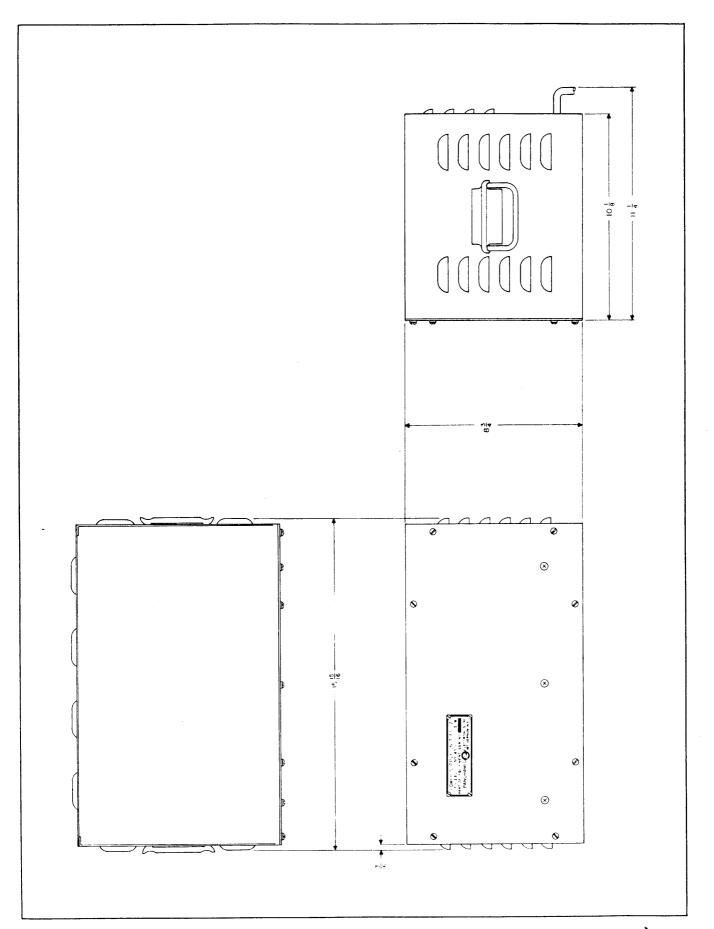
Outline Dimensional Drawing, Model PS-12 in Cabinet.
